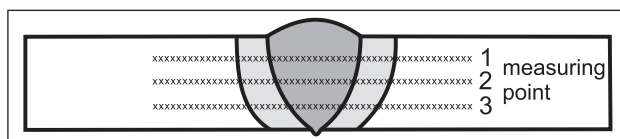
Locations on true welded specimens for hardness measurements
